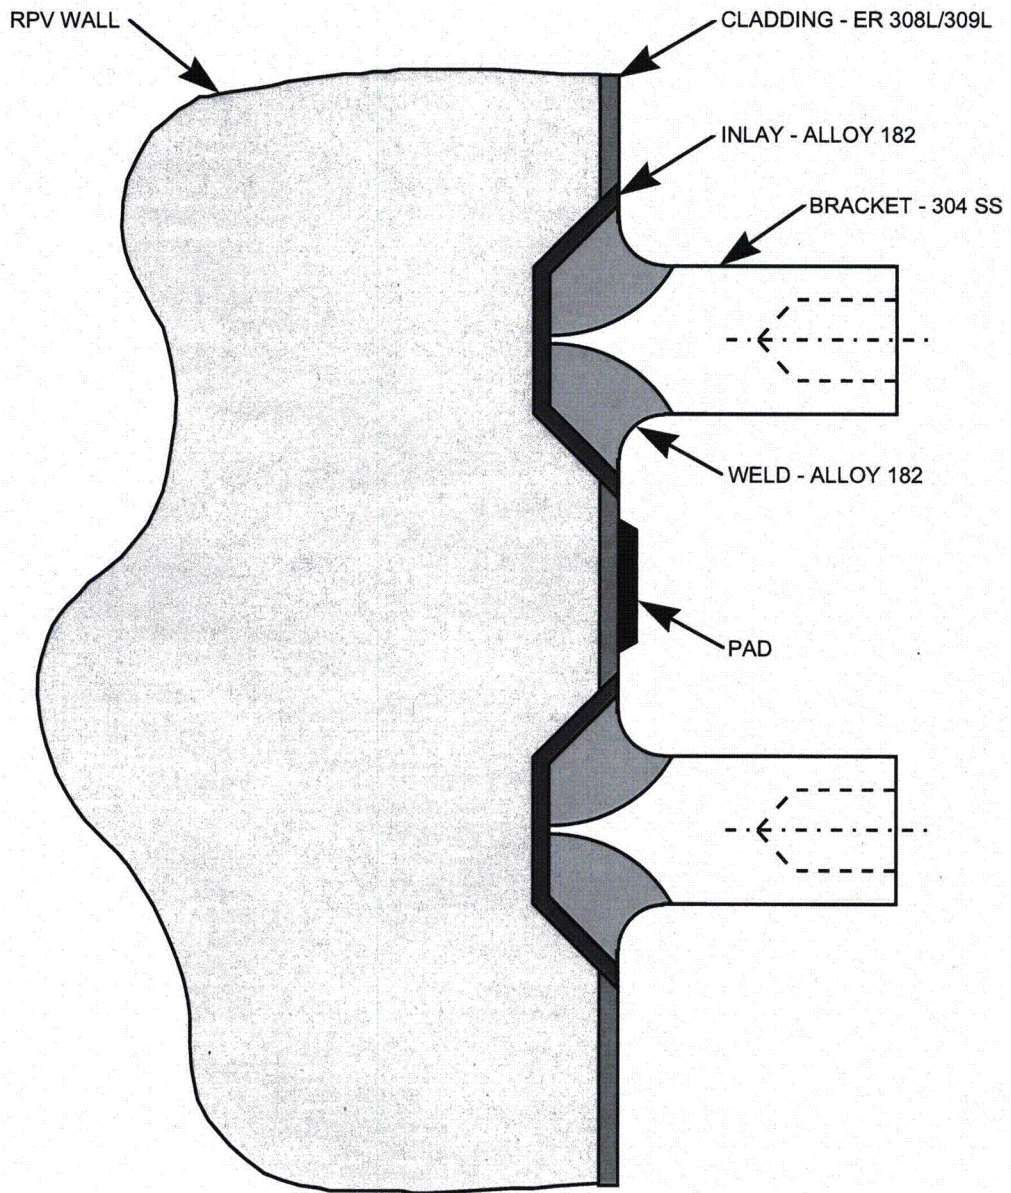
Typical BWR core spray bracket attachment weld configuration. Alloy 182/82 are used.
